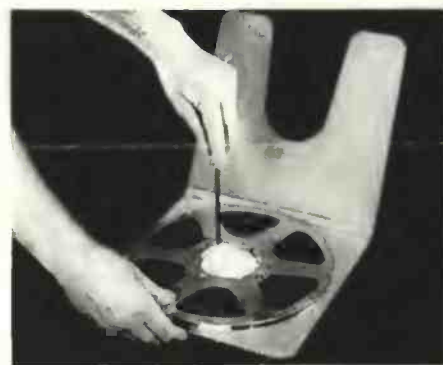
FIG. E. — Inner section of box turned over, with the other reel flange being screwed in place.
